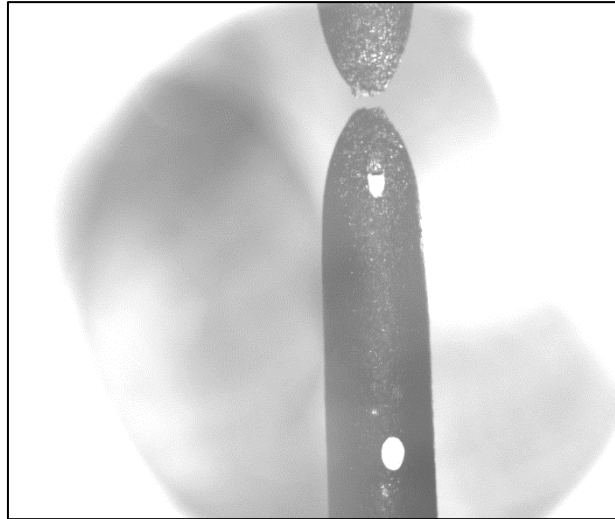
16 Fractured specimen tested in air (FCS4). The necking and fracture occurred out of the range between the markers.
